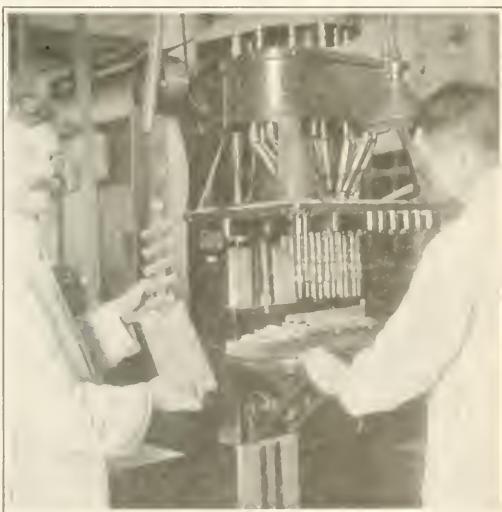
Counterboring on a Multiple Spindle Drilling Machine
